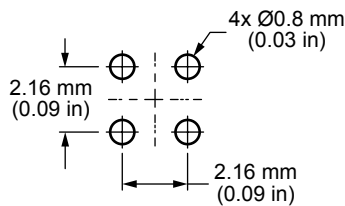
Recommended PCB Dimensions for the CONSMPO01-2-G
